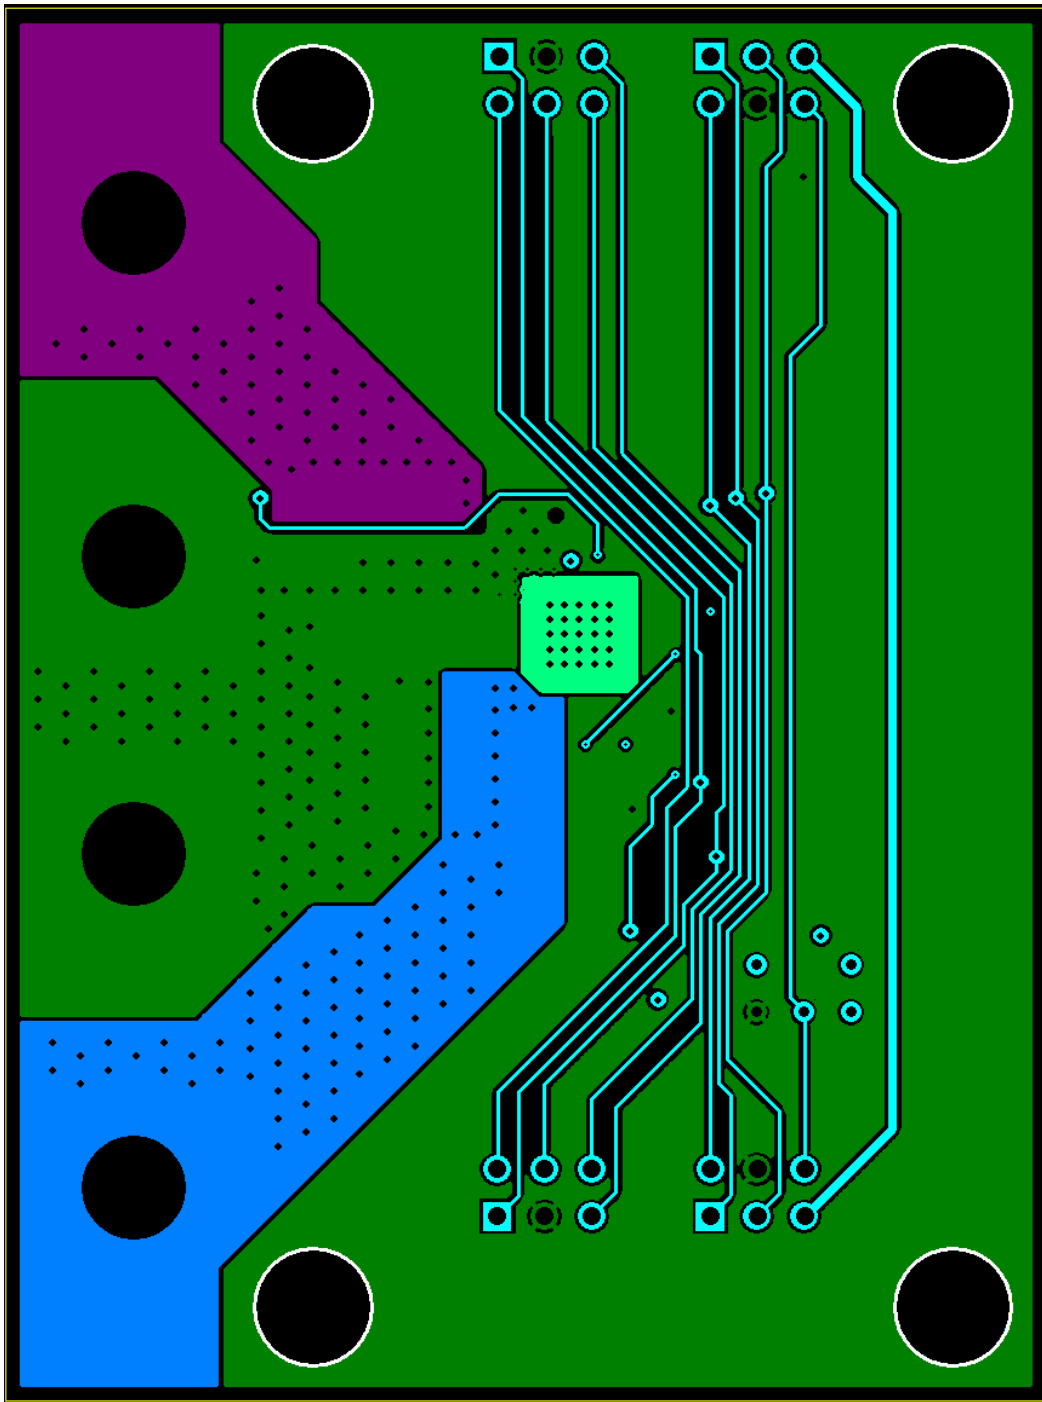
PCB - INNER LAYER 2 (VIEWED FROM TOP)
